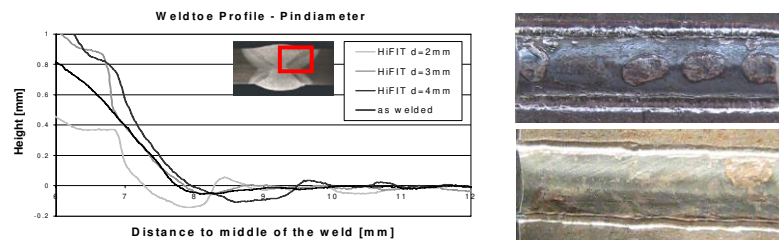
Weld toe profile before and after the treatment with different pin diameters (left), weld toe after UIT(upper right) and HiFIT (lower right)
